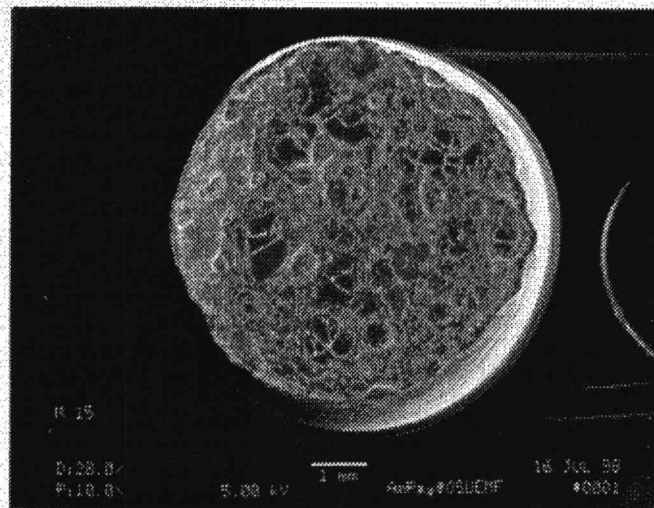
Fracture surface of stainless steel at $T_w = 0$.
